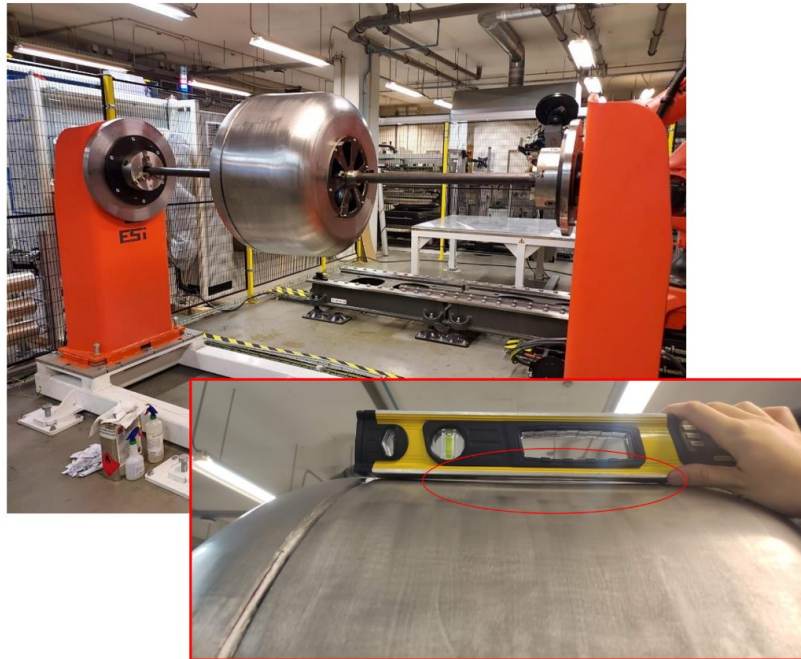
Example of negative draft angle due to sinking/warping due to welding to the mandrel
